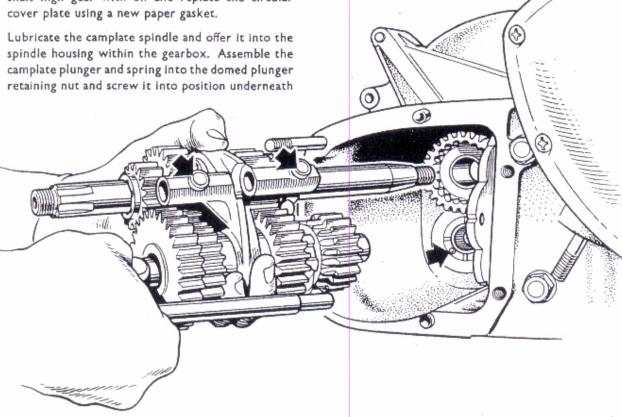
Reassembling the gearbox components. Arrows indicate camplate rollers in position and thrust washer correctly located
